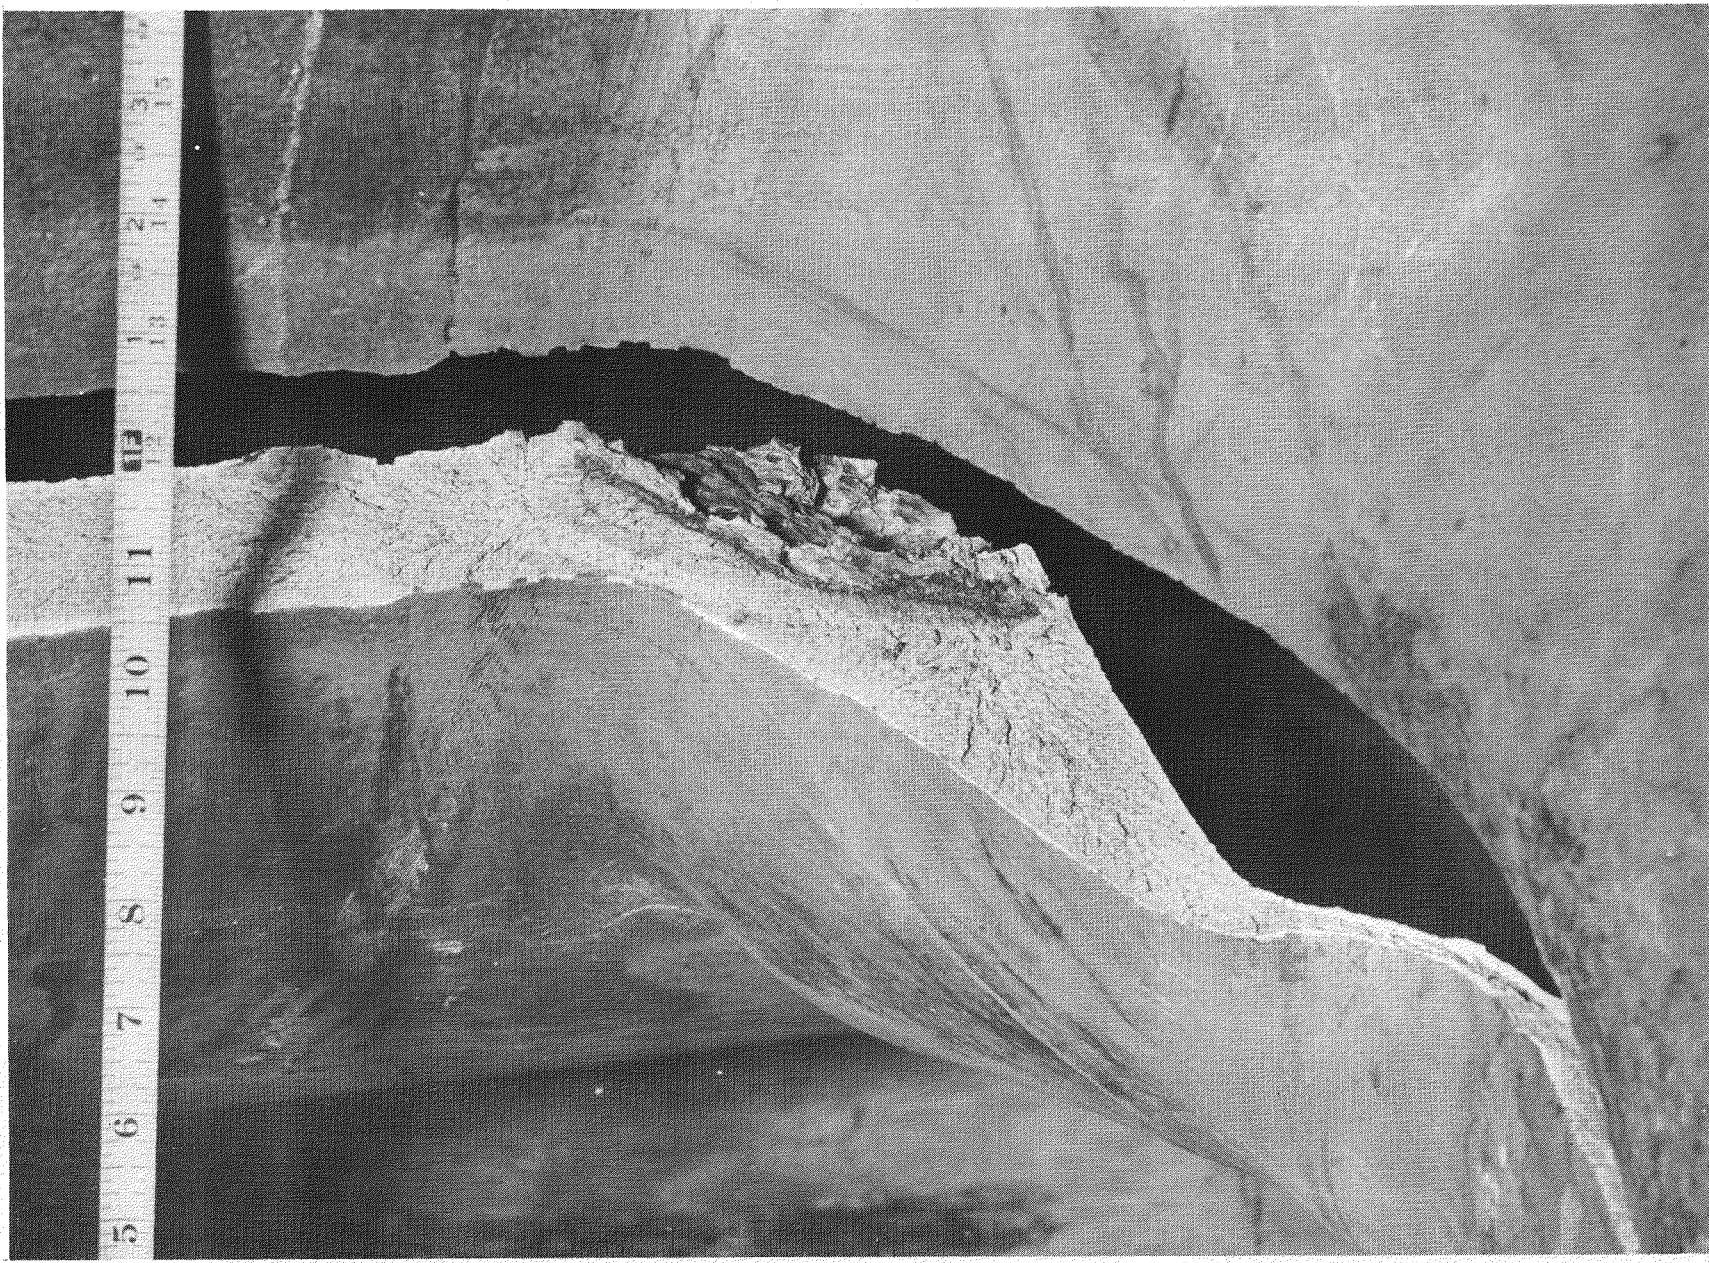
Close-up of Fracture, Nozzle No. 6, Showing Weld Repair Zone in Vicinity of Corner Radius
